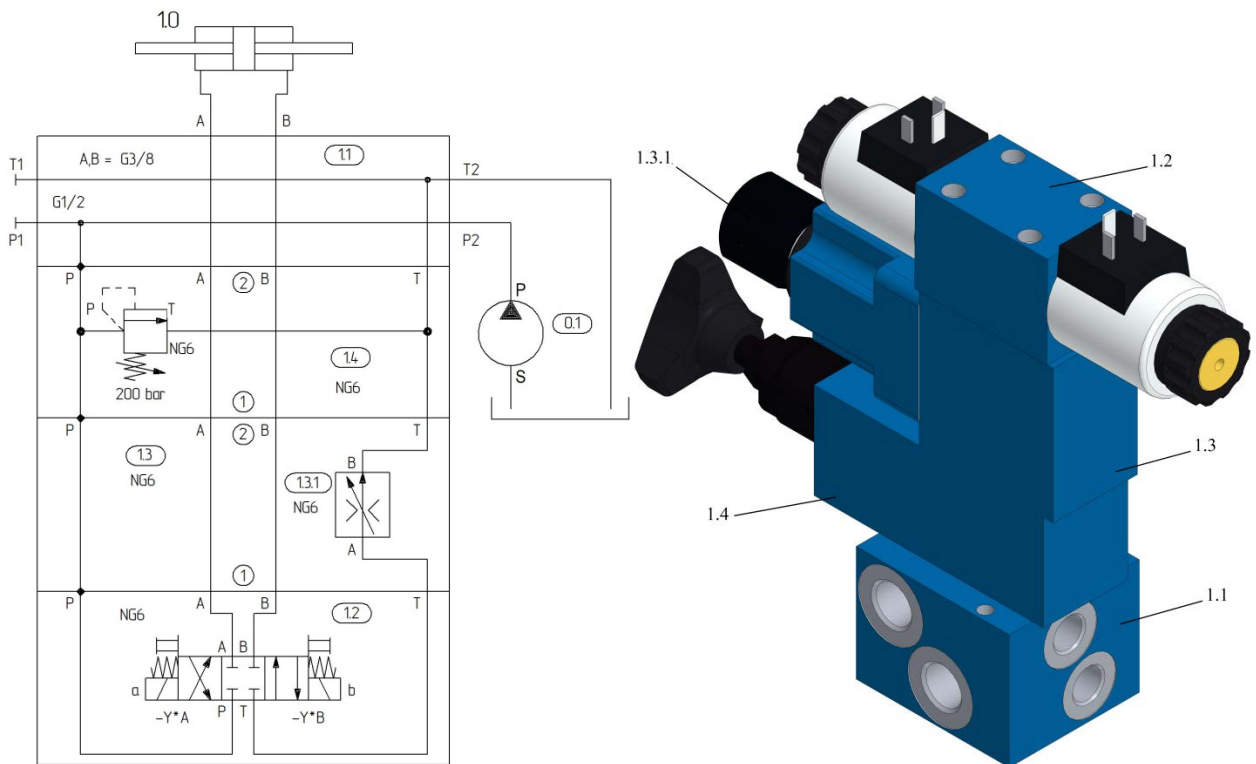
Modular unit to control movement and speed (the same in both directions) of the hydraulic cylinder:
